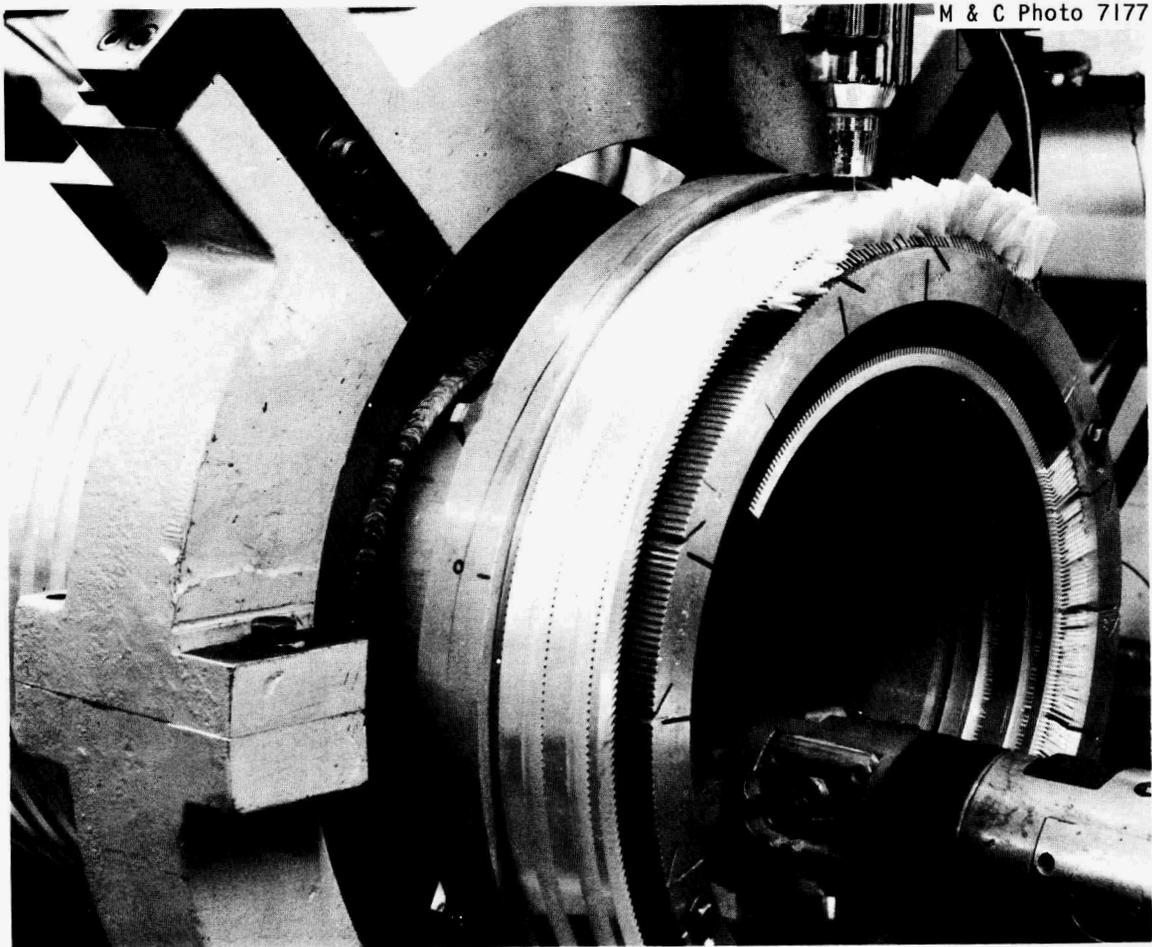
Outer Fuel Element Circular Weld-Test Assembly Ready for Welding.
